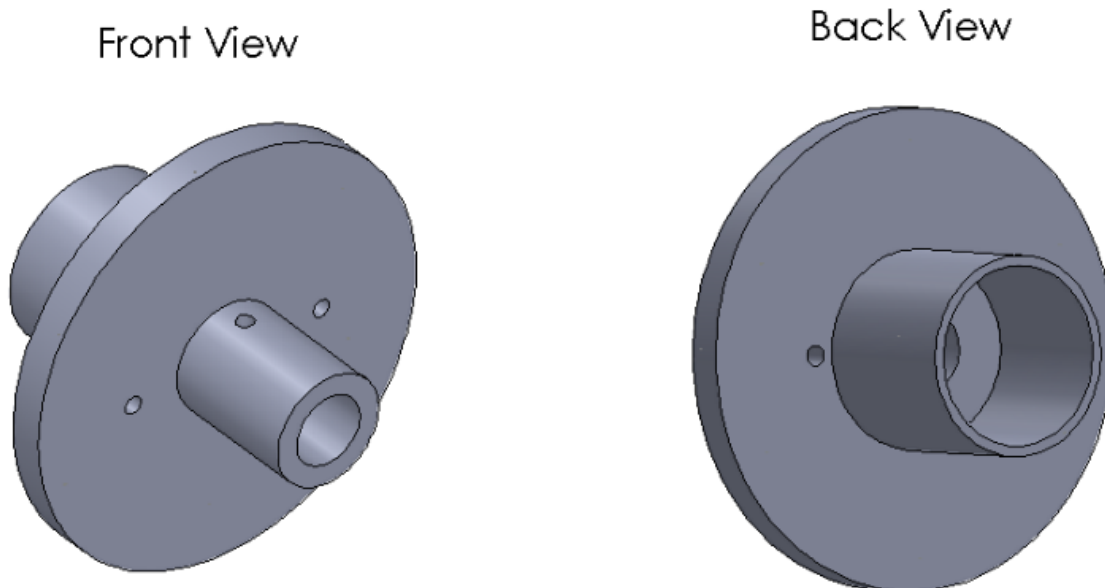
The third piece of the flange relative to the furnace. The port on the front view contains an inlet to allow for continual N_2 purging of the inner tube, and the bores flanking the port are for the inlet/outlet and thermocouple.
